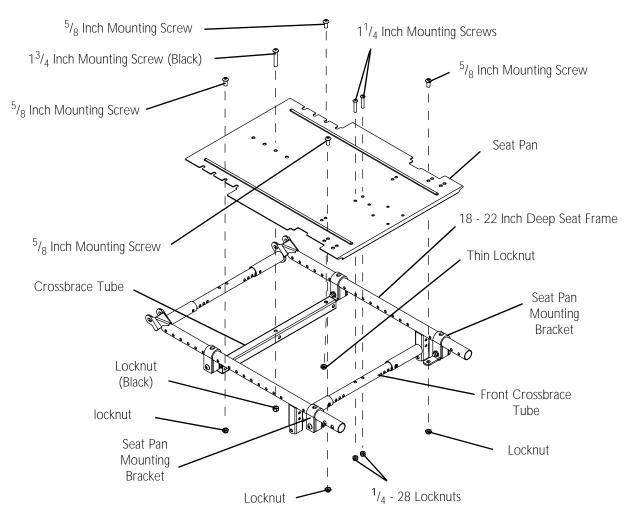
Install the Seat Pan - Drop Mount - 18 - 22 Inch Deep Seat Frames
